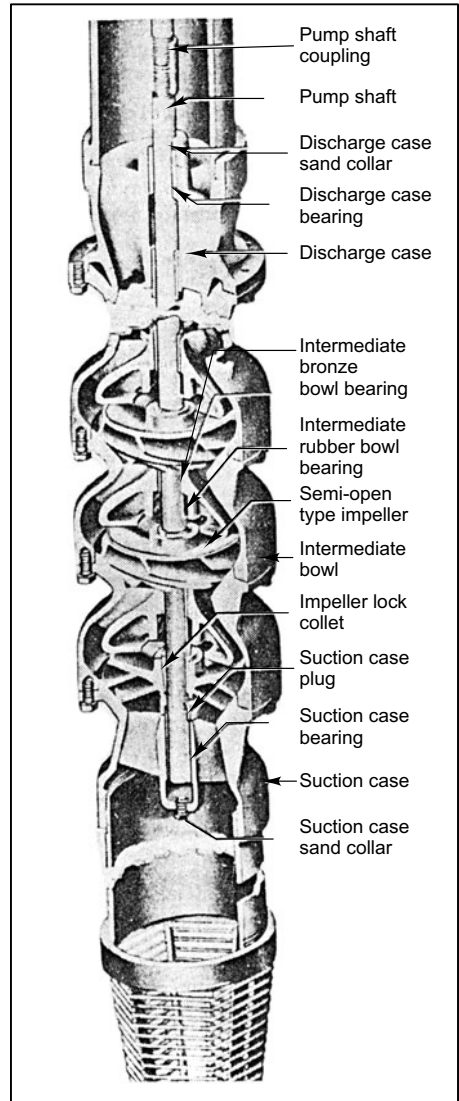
Pump bowl assembly in water-lubricated pump with semi-open impellers
